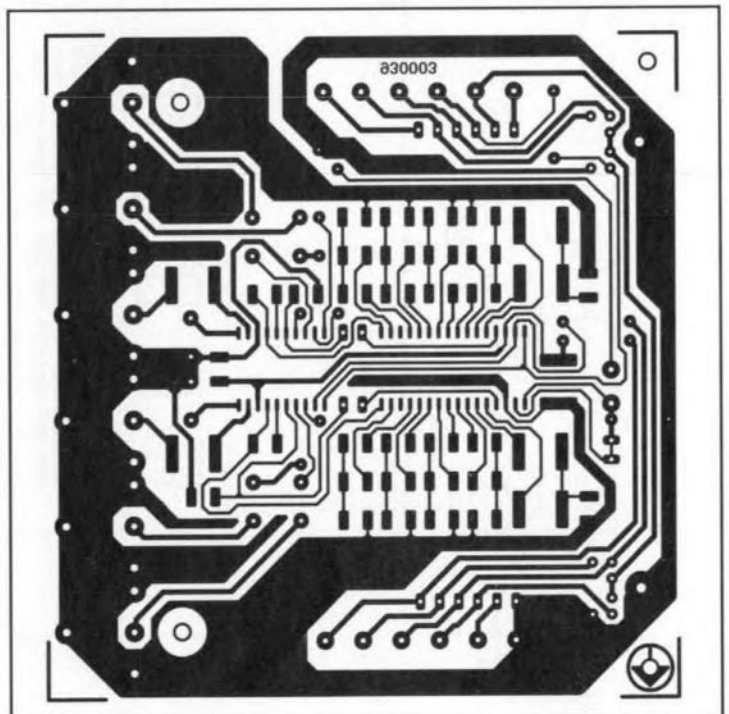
The printed-circuit board for the amplifier has a double-sided component layout.
